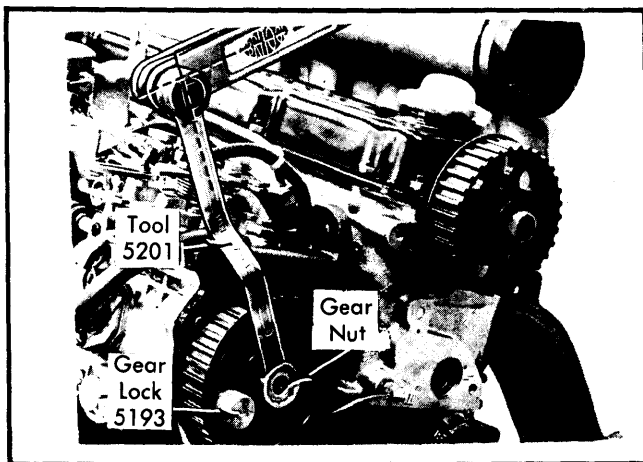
Removing Injection Pump Gear (Volvo Shown)
